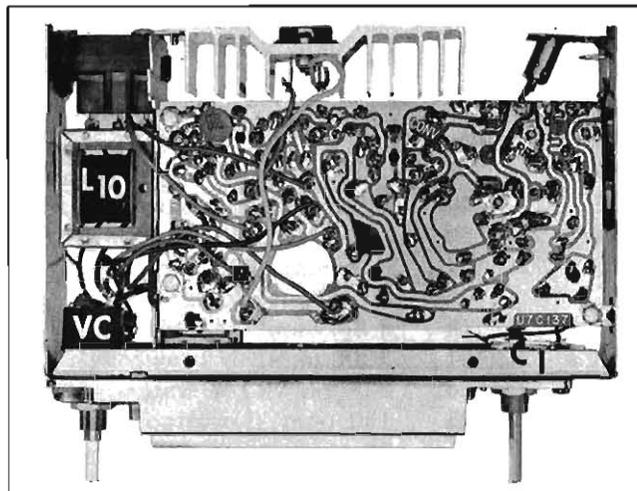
CORVAIR SERIES 95 PARTS LAYOUT - CIRCUIT BOARD VIEW - 985815 - RADIO
